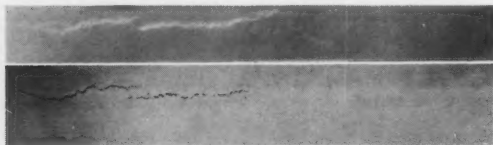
UPPER SECTION RADIOGRAPH OF STEEL CASTING WHICH APPEARED PERFECT BUT CONTAINED INTERNAL TEARS AND SHRINKAGE. LOWER SECTION PHOTOGRAPH OF THE SAME AREA AFTER SUFFICIENT METAL WAS REMOVED TO DISCLOSE SOME OF THE DEFECTS.
